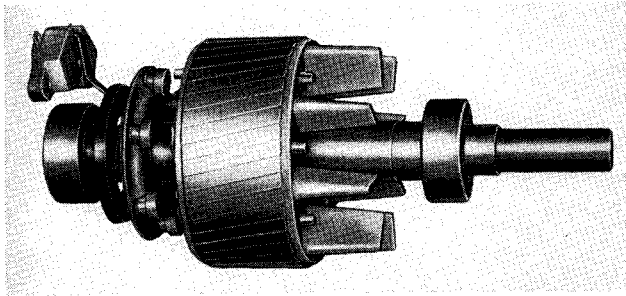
Complete Rotor with Governor Mechanism of the Centrifugal Switch in Place and Contact Assembly in Relative Position
